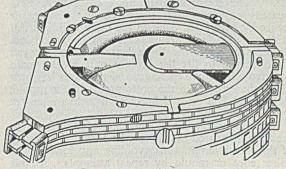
Top Part of the Mould closed and Top Plate removed.
